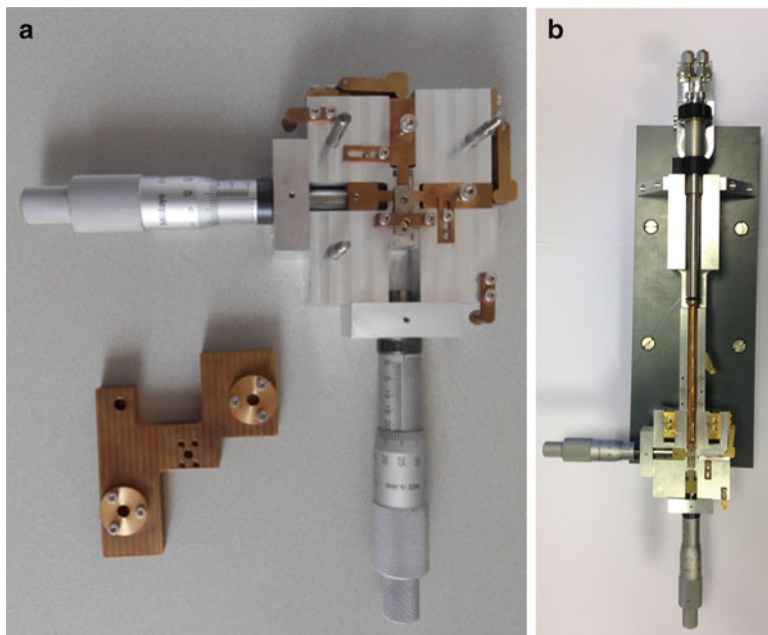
(a) The alignment tool for a static gas holder. (b) The alignment tool for a gas-flow holder. The latter alignment tool is much larger because the holder has to be supported in one direction
